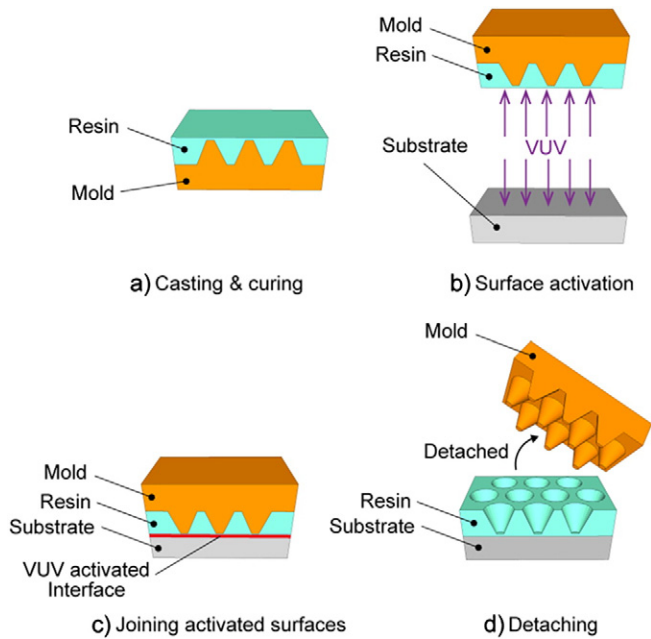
Schematic diagram of VUV assisted direct transferring process: (a) casting and curing of resin on master mold, b) surface activation by VUV irradiation, c) joining activated surfaces, d) detaching mold master from resin.
